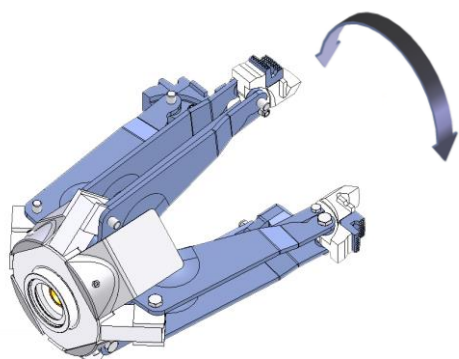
FOUR-JAW UNIVERSAL CHUCK
